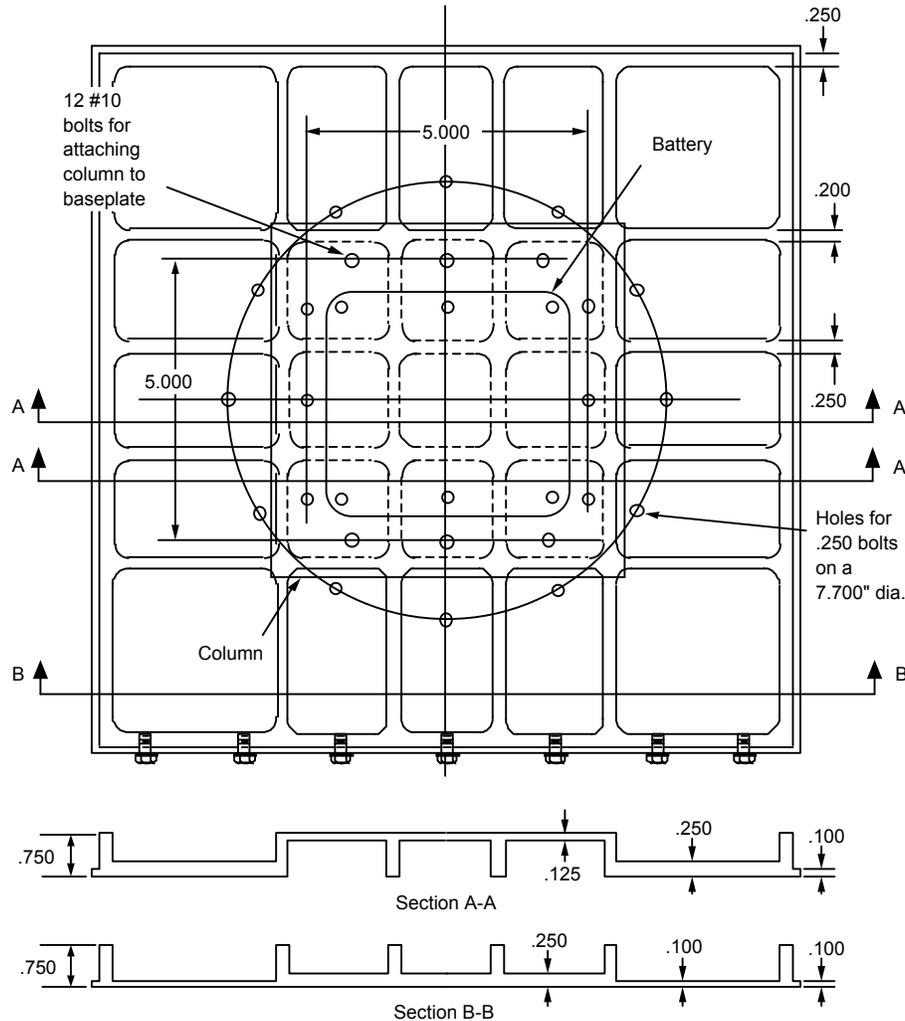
Design of the Flight Baseplate. The plate is machined from both sides to provide interfaces for the column (top) and adapter ring (bottom). A battery mounts as shown inside the column. For clarity, not all dimensions are shown. The bolts shown along one edge are actually used for all four edges to attach the side panels of the box structure.
